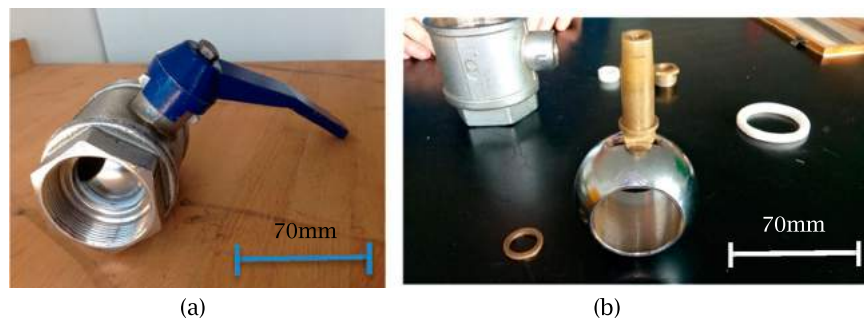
(a) Hydraulic ball valve assembled and (b) major components of this valve.
